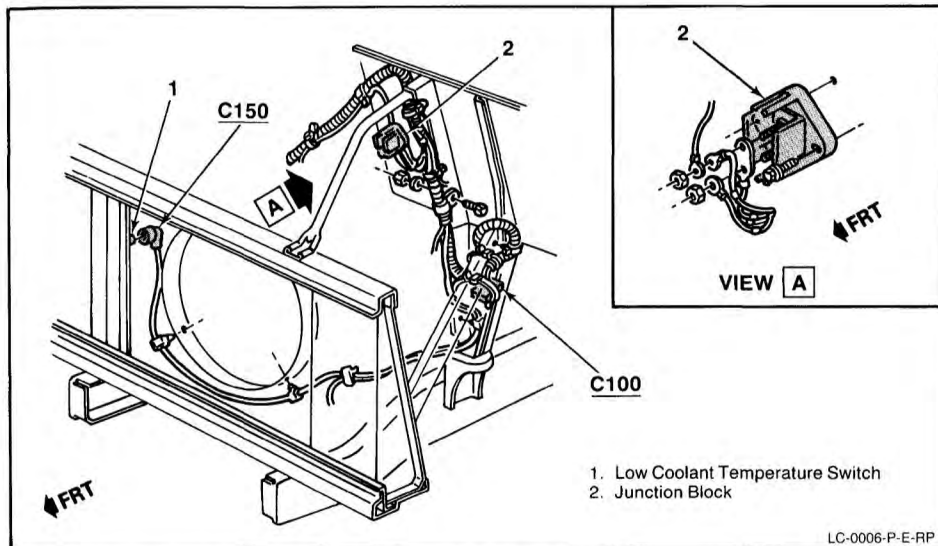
Engine Wiring Harness to Cowl/Radiator (RPO LL4 w/P42)
